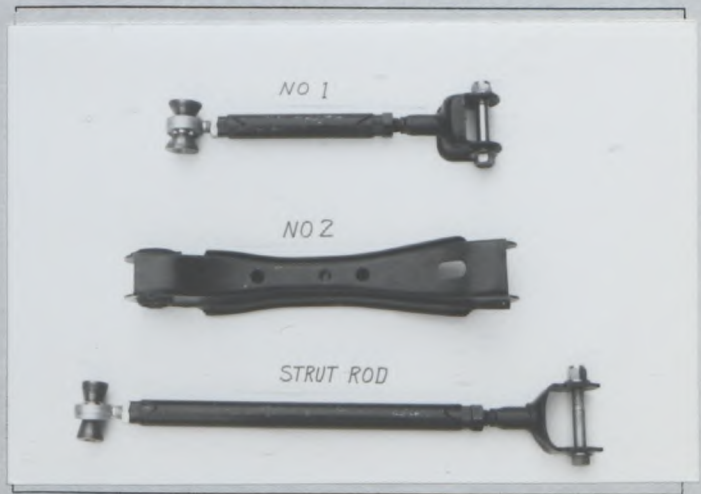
REINFORCED SUSPENSION ARMS No. 1 & No. 2 AND STRUT ROD, TYPE B
